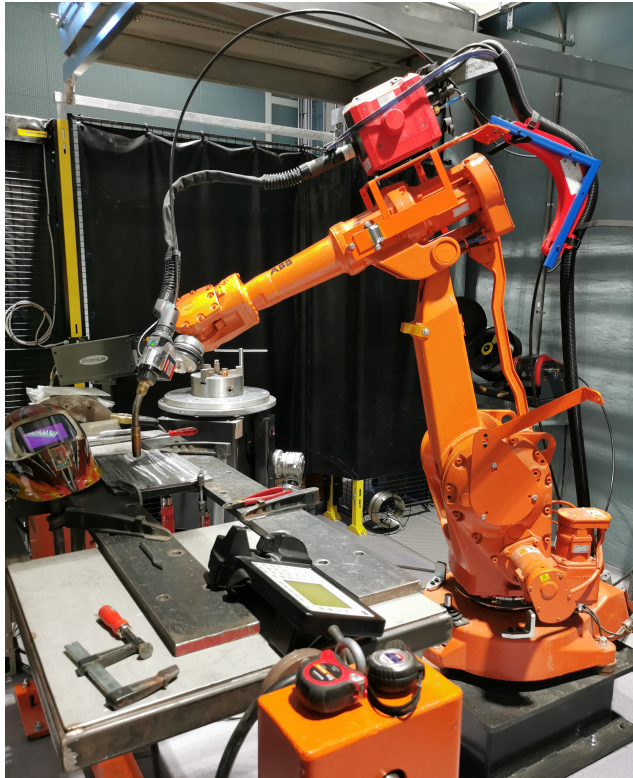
Wire-arc additive manufacturing: Most of the lab work presented in this thesis was done using this robot cell with a IRB 2400/10 6-DOF robot manipulator from ABB, and Fronius CMT welding equipment.
